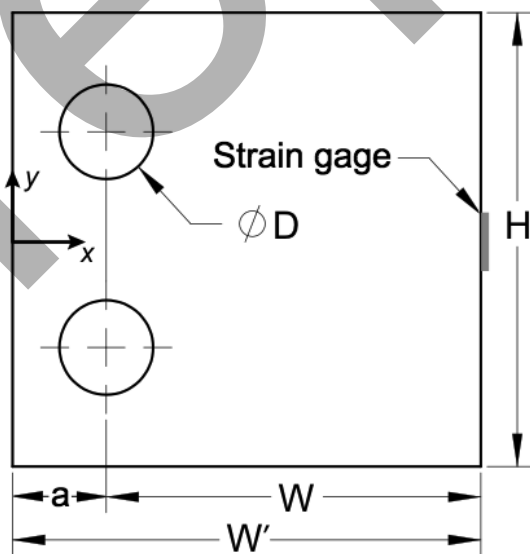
C(T) coupon blank geometry and coordinate axes used in analysis; dimensions given in Table 1.
